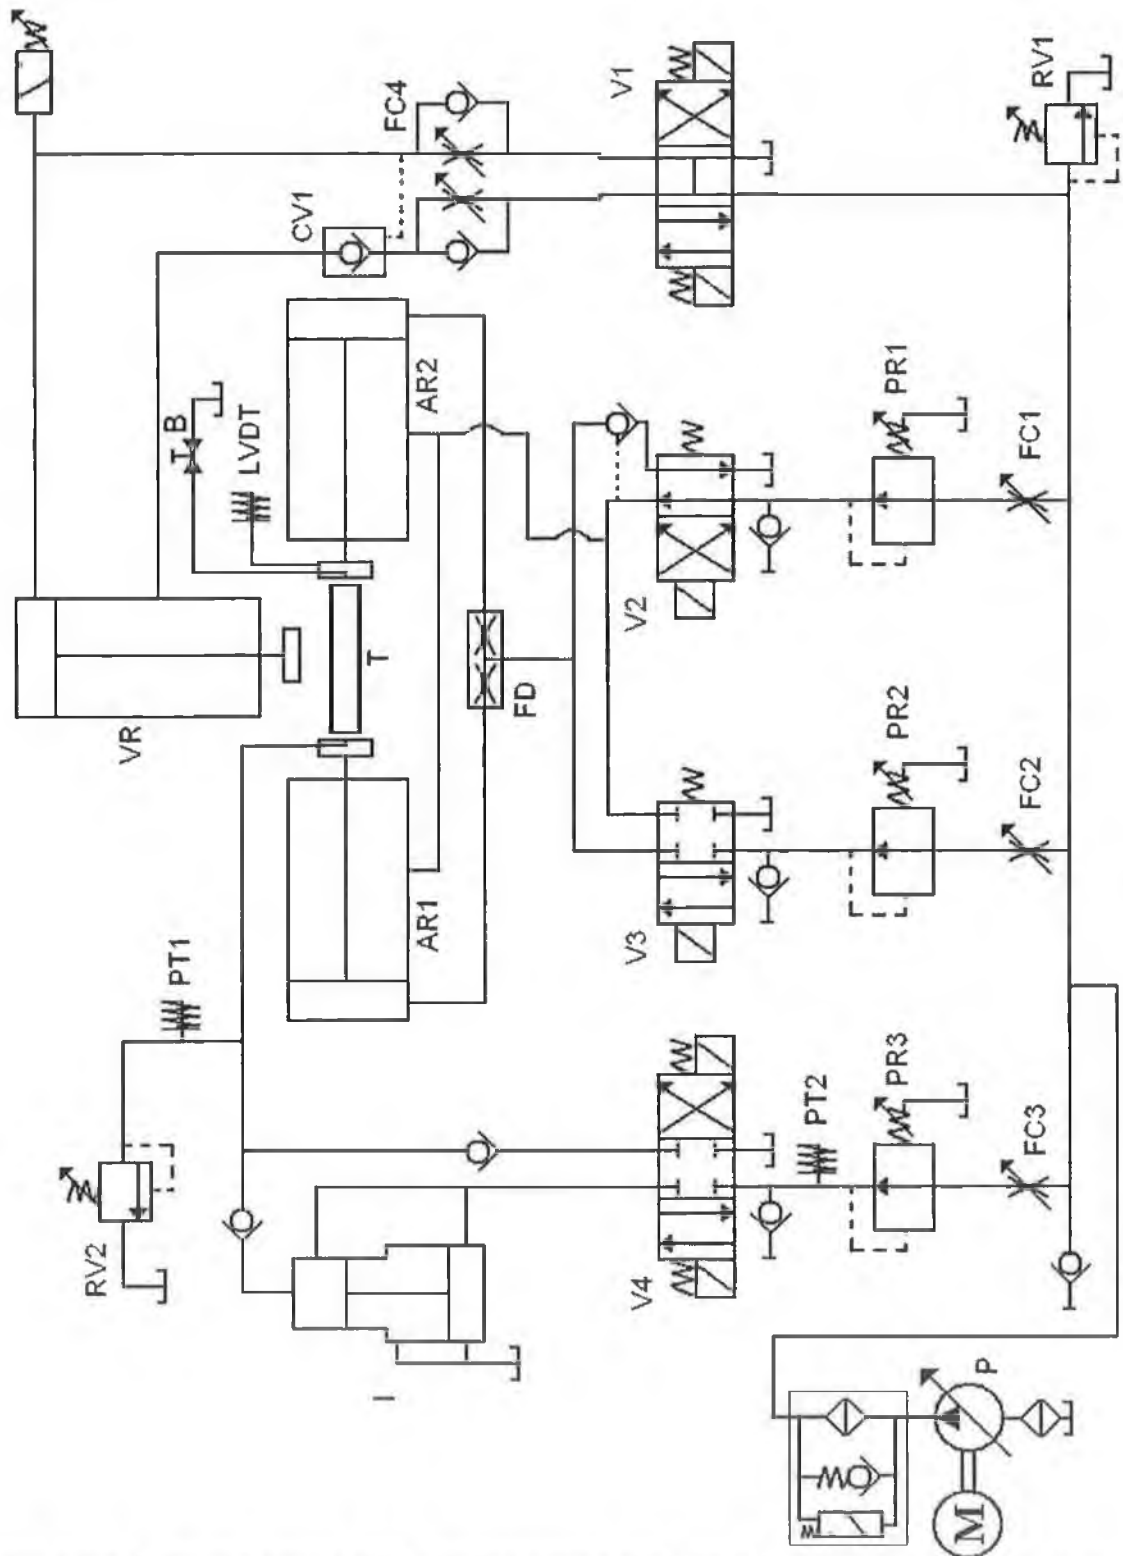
Hydraulic circuit of the hydroforming machine (M-motor, P-pump, FC-flow feed control valve, PR- pressure reducing valve, V- 2 way/ 3 way flow valve, RV- relieve valve, CV- check valve, B- bleed valve, FD- flow divider, PT- pressure transducer, LVDT-linear variable displacement transducer, I- intensifier, AR- axial ram, VR- vertical ram, T- tube blank)
